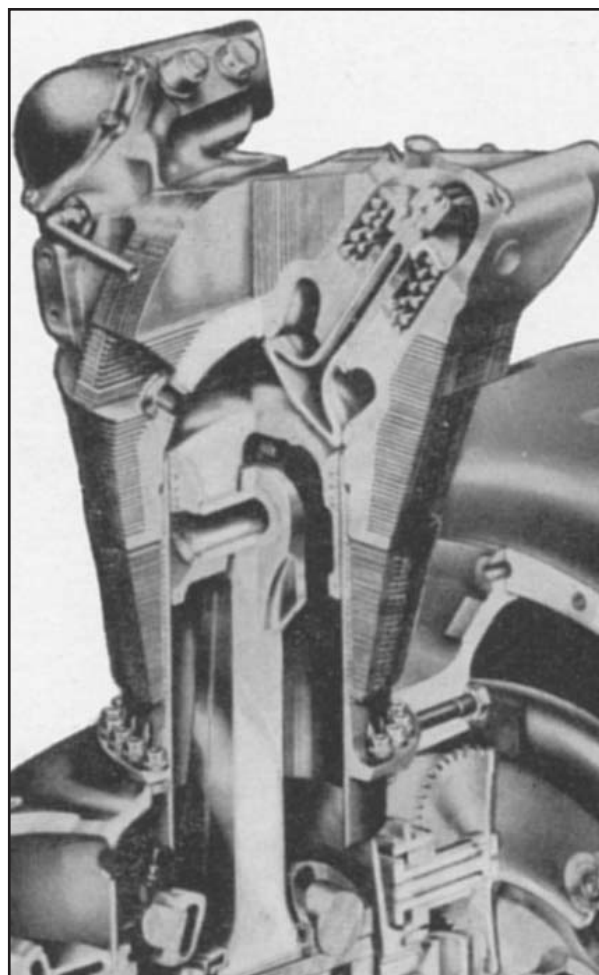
View of a Sectioned High-Output Poppet-Valve Engine Cylinder Circa 1948 - Curtiss-Wright TC18 (R-3350)
